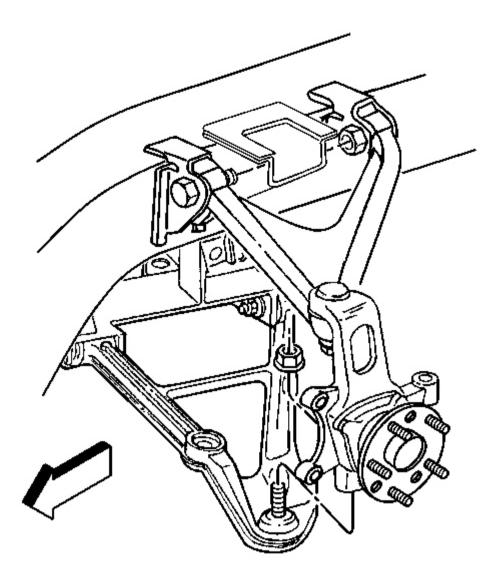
Shock Absorber & Lower Mounting Bolt Courtesy of GENERAL MOTORS CORP.
